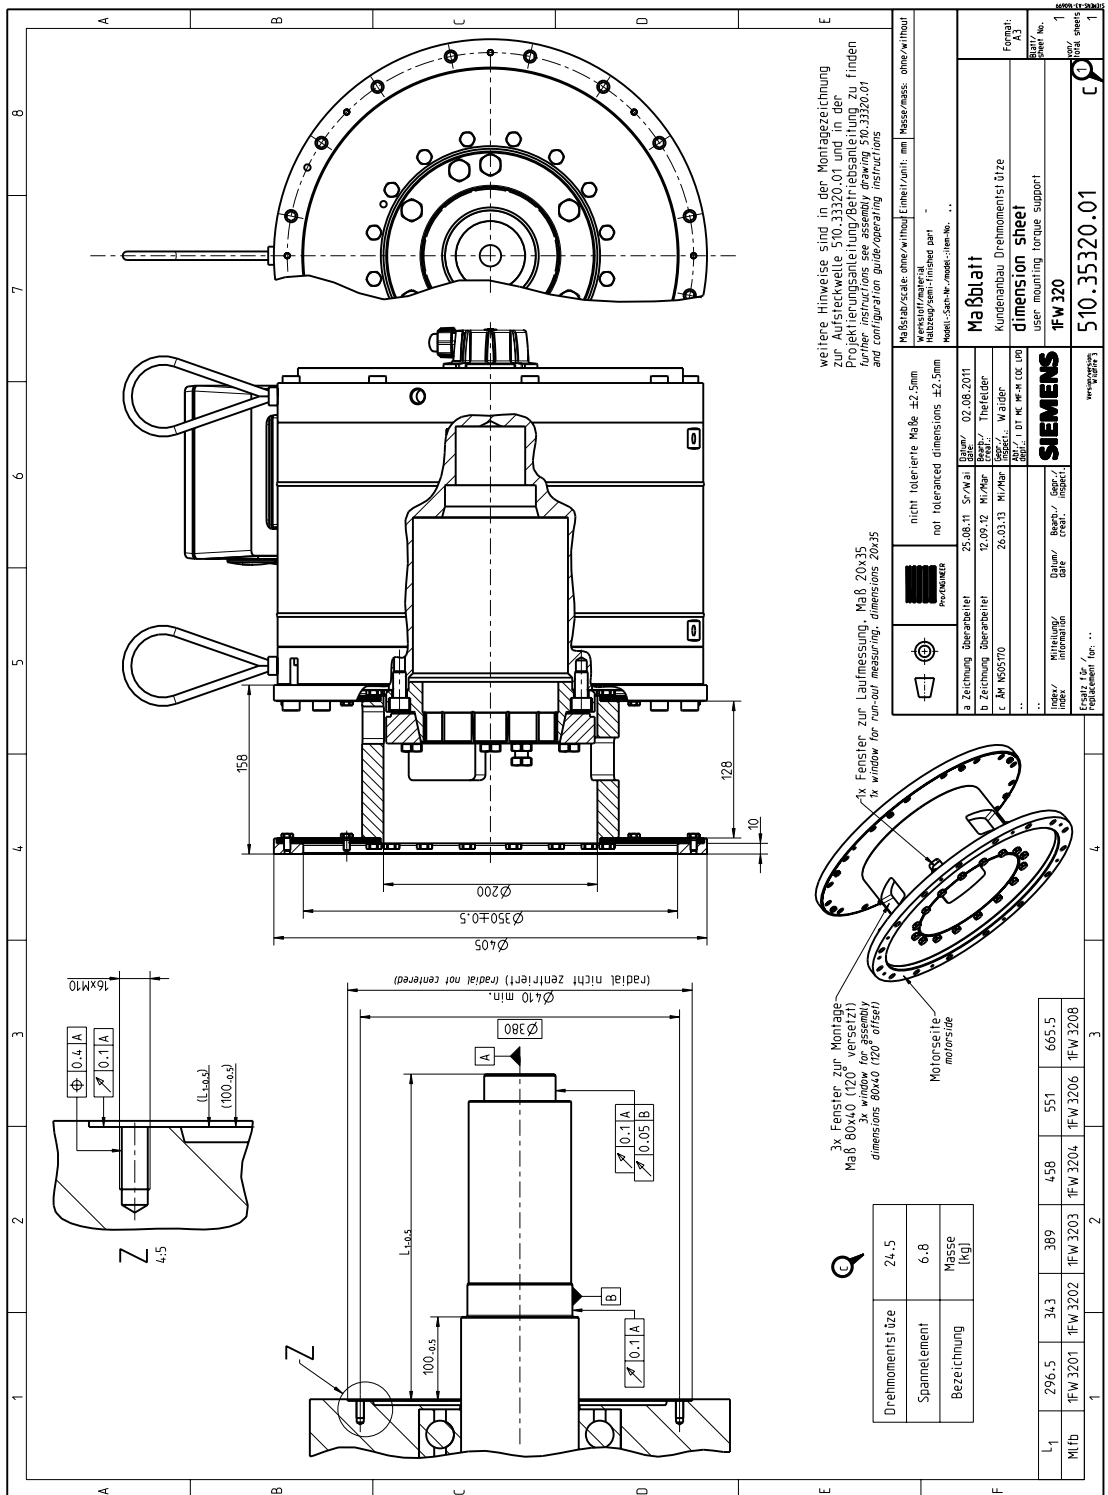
1FW320 Siemens torque arm, dimension drawing 510.35320.01
